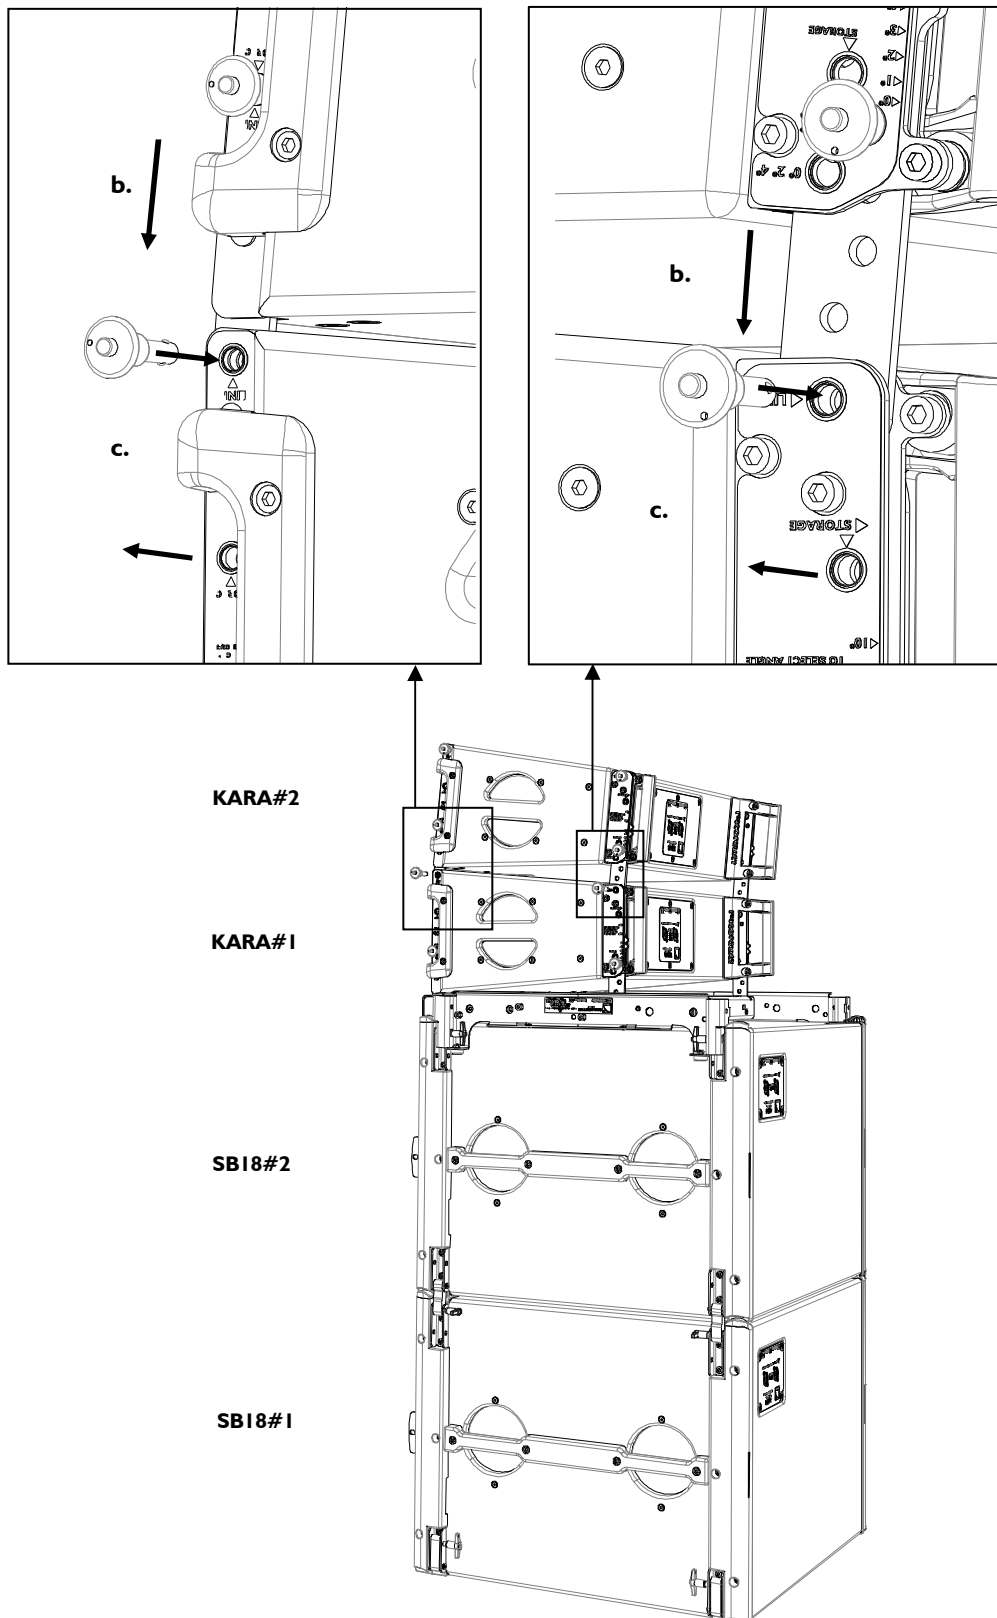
Attaching the KARA#1/platform assembly to SB18#2
